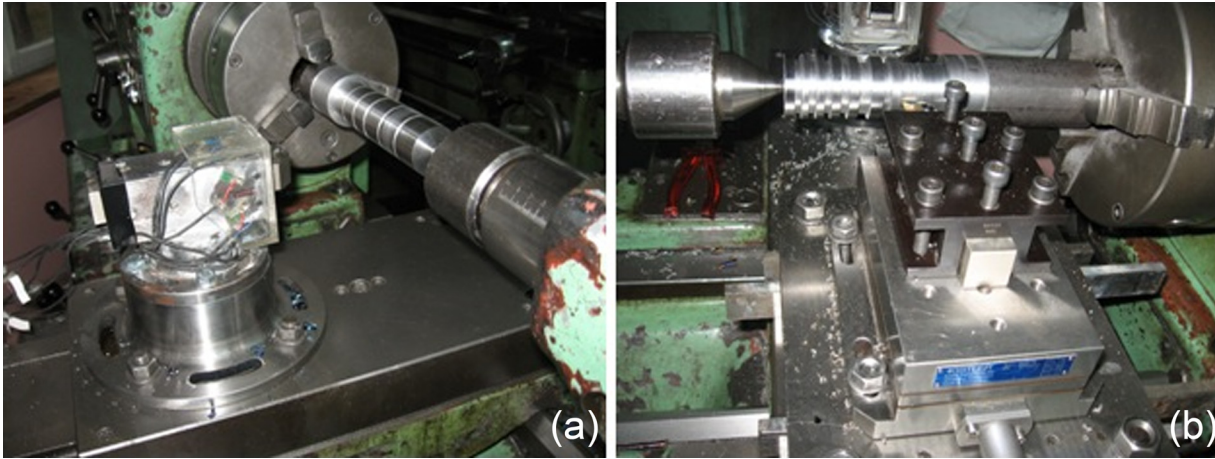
Machining using (DM), the manufactured dynamometer (a) and Kistler-9257B (b)
